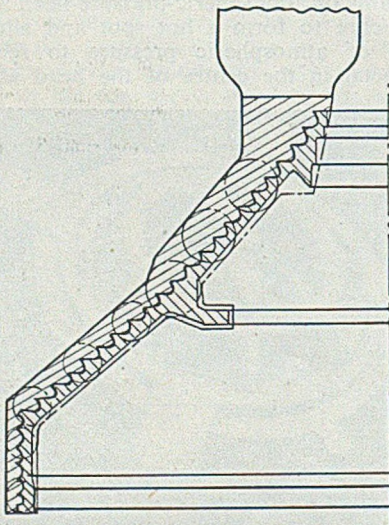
Section of Rope-drum Casting on which the Heuver-circle Method was applied.
